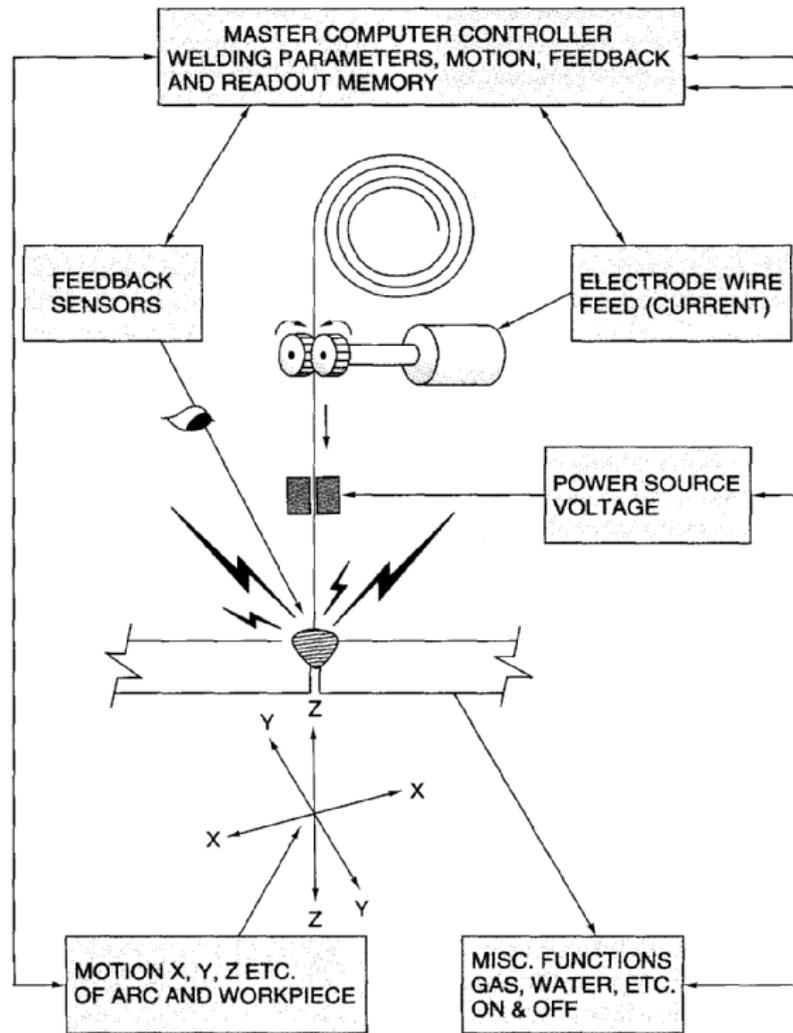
Adaptive control of an arc welding system. (Cary p. 328)
